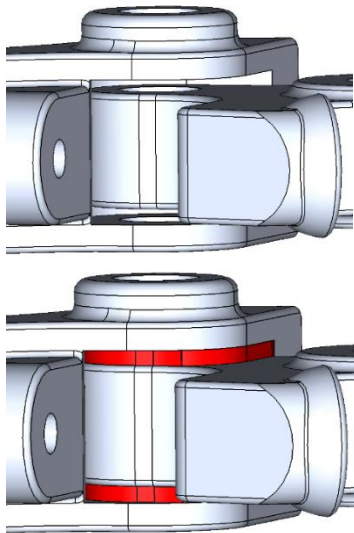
An automatically constructed weld between two adjacent components.
